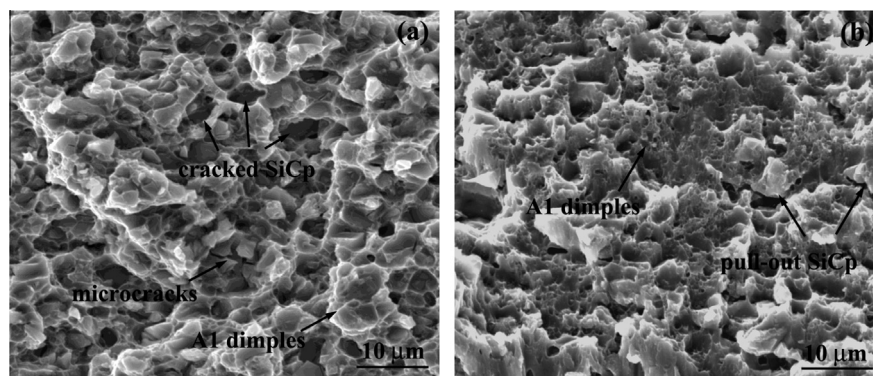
Typical SEM images showing tensile fracture surfaces: (a) BM, and (b) FSW SiCp/AA2009 joint.
